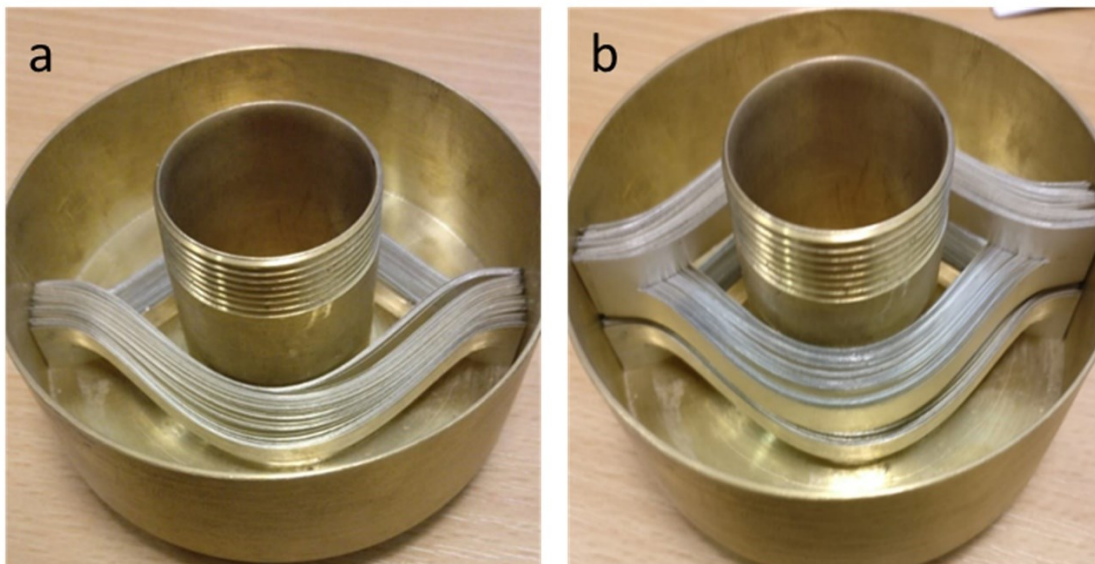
a) Single stack having 50 rings. b) Double stack of total 120 rings.
